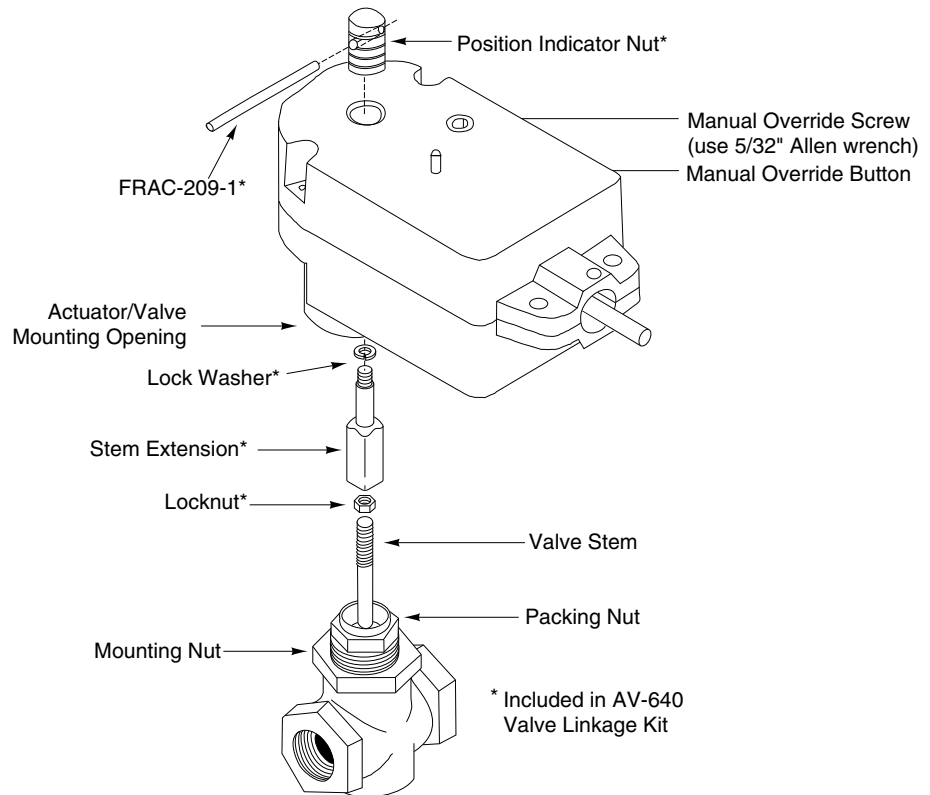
MF-221xx Series Actuator Valve Assembly with Obsolete AV-640 Linkage.
